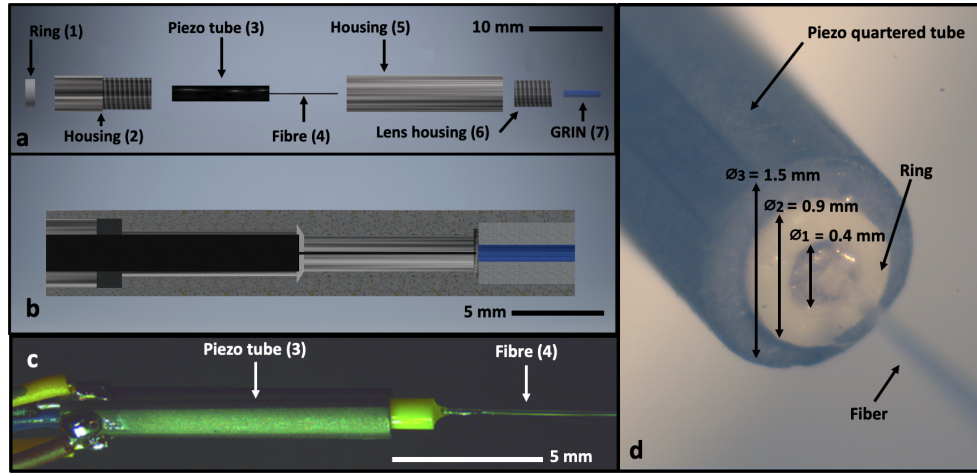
a) Optomechanical elements b) Mechanical assembly of the elements of the imaging probe c) PZT connections d) Front-view of the imaging probe. The probe was assembled by the project partner L4T-Light4tech.
